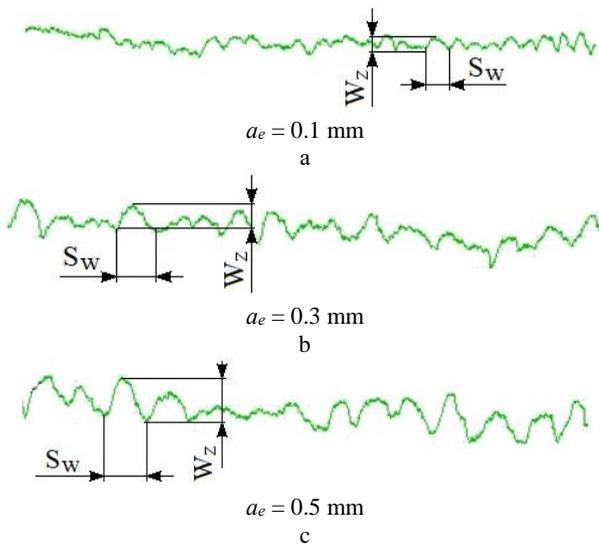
Profilograms of machined surfaces after down milling with different radial depth of cut
